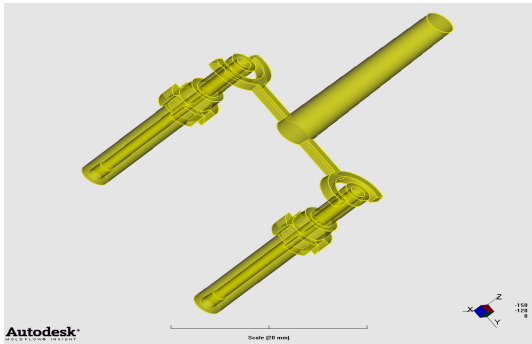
Solid model of 2-cavity flange for metal power injection molding
